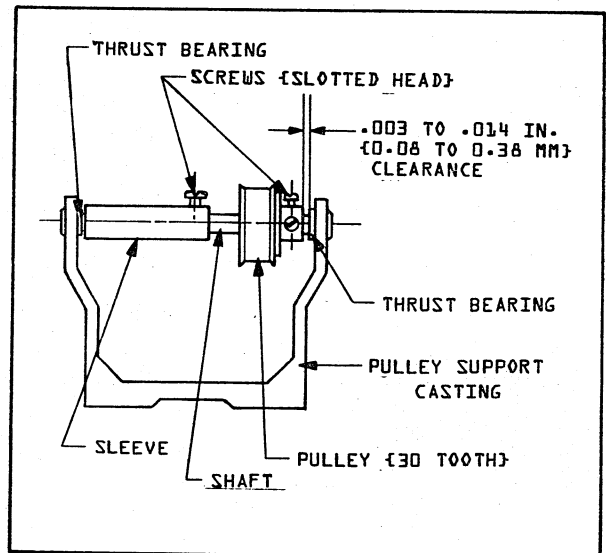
PULLEY ASSEMBLY - LEFT HAND
